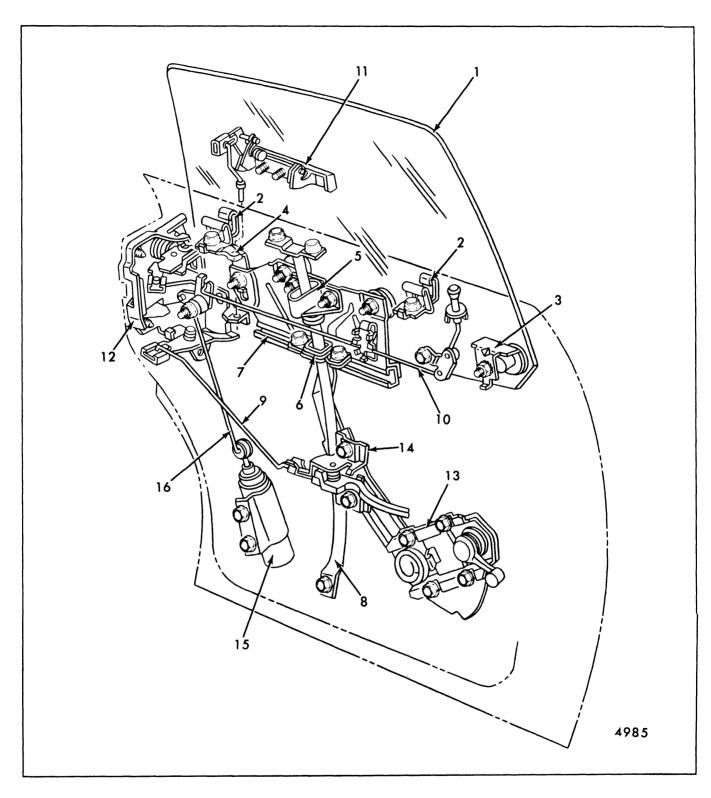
Rear Door Hardware - "A-29,35" Styles
